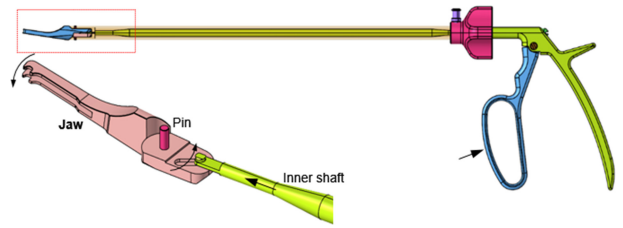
Geometric shape of the blood vessel ligator and detail view of the shaft tip
